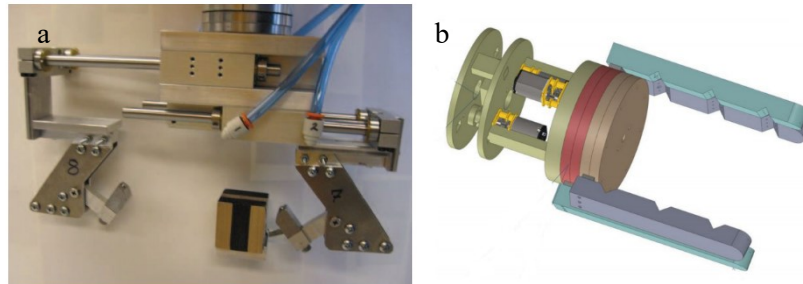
(a) Ziesmer Reconfigurable Gripper Prototype [48] (b) SIMBA Soft Reconfigurable Gripper [67] Makris et al. [68] presented a reconfigurable gripper for dextrous manipulation in flexible assembly. The design was intended to result in a high-speed multi-fingered gripper. The gripper consists of three fingers with a total of eight DOF. The gripper attained a wide range of grasping modes, the centripetal grasp, the parallel grasp, and the encompassing and pinching grasps. Figure 2-13 presents these different grasp orientations. Each of the fingers received actuation from a motor and is directly coupled to the output shaft of the motor. The fingertips are also motor-driven at the tendons.
